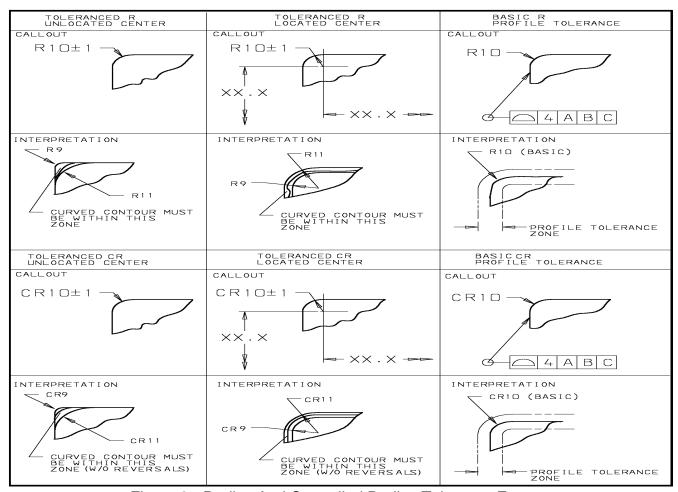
Radius And Controlled Radius Tolerance Zones
